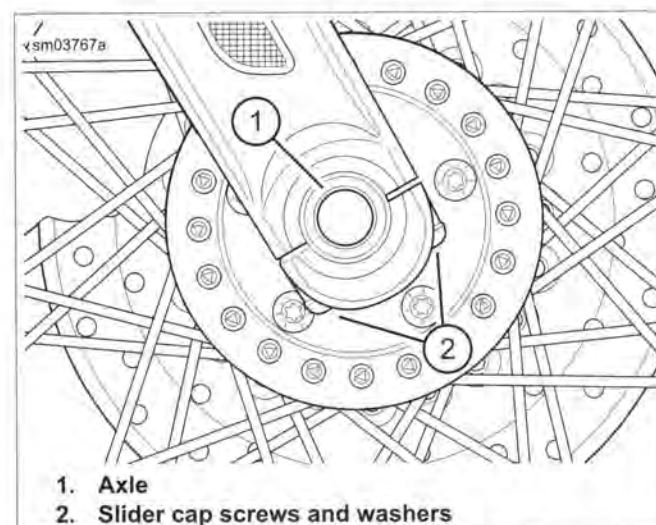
Front Wheel Mounting: All but FLD (Right Side)
